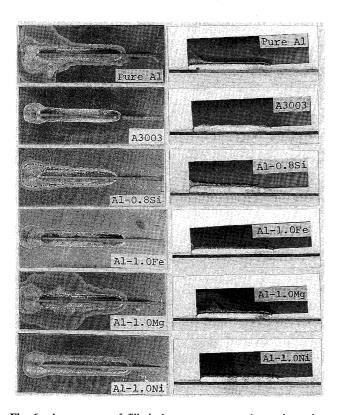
Appearance of filled clearance test specimens brazed at 680°C for 3 min with various aluminum filler metals.
